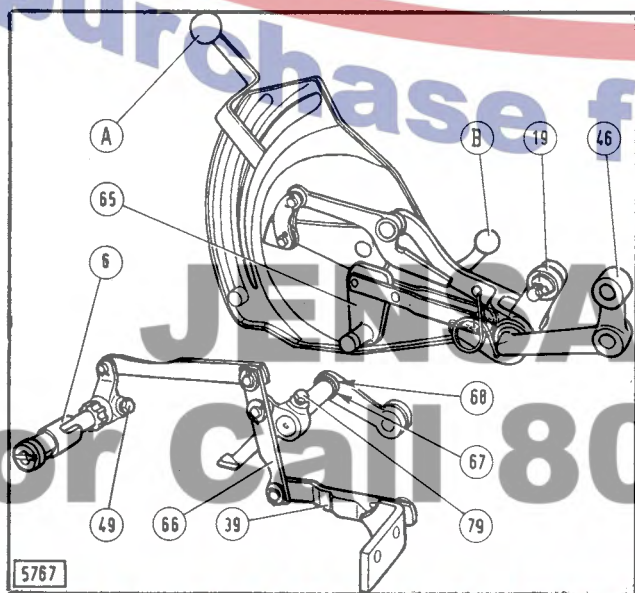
Spool control linkage. (A) Lift control lever. (B) Selector lever. (6) Spool. (19) Roller. (39) Link. (46) Draft control lever. (49) Setscrew. (65) Arm. (66) Rocker arm. (67) Seal. (68) Spacer. (79) Setscrew.
